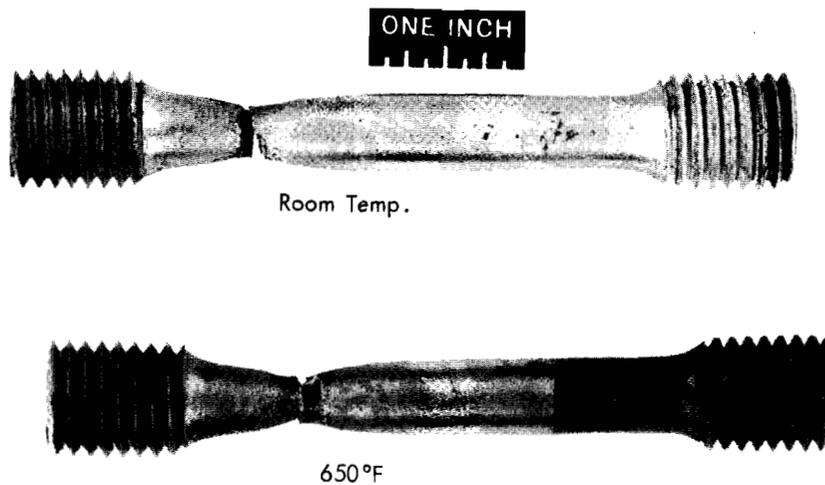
ASTM A-212 B-to-Type 304 Stainless Steel Transverse Tensile Specimens Welded with Inconel-182 Electrode.
